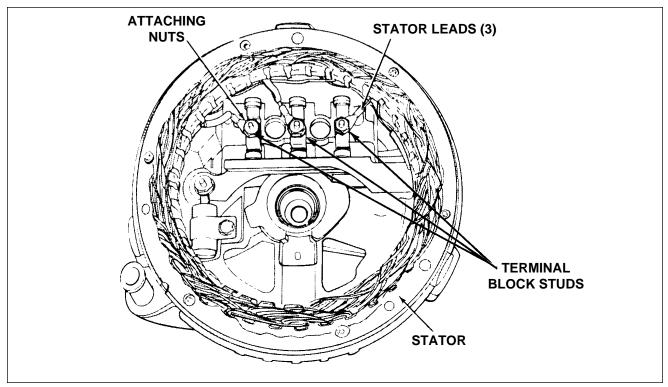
Chrysler Alternator Rectifier End Shield and Stator Assembly
